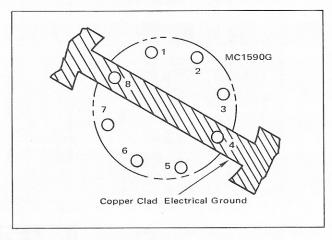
View of Copper Clad Side of Printed Circuit Board
